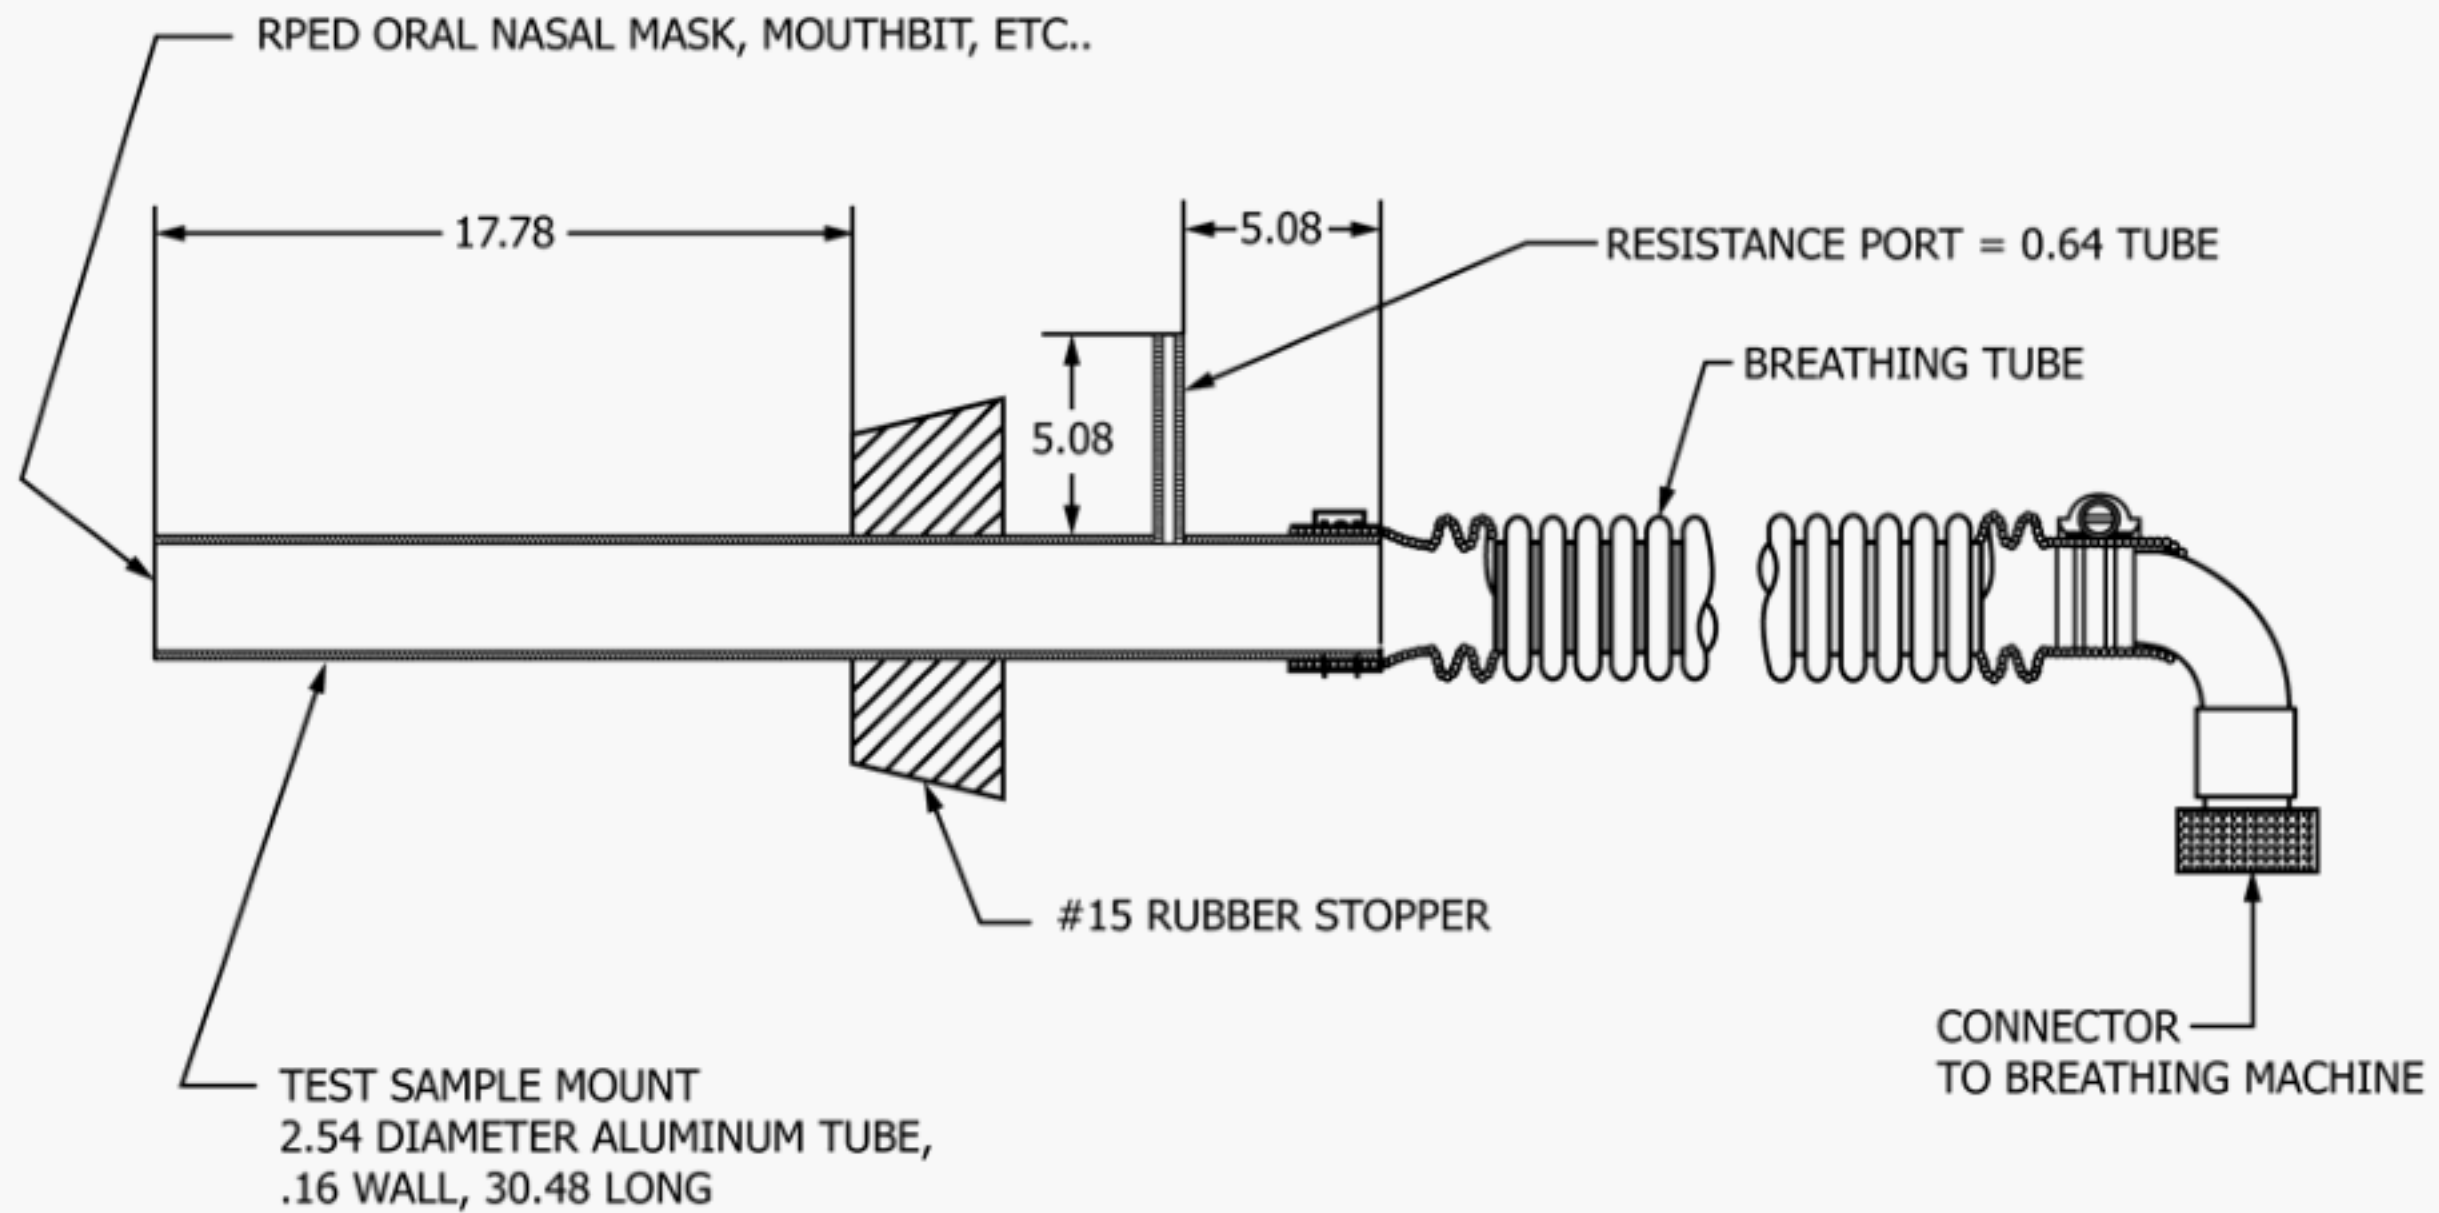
Schematic of Soot Particulate Apparatus Test Fixture
